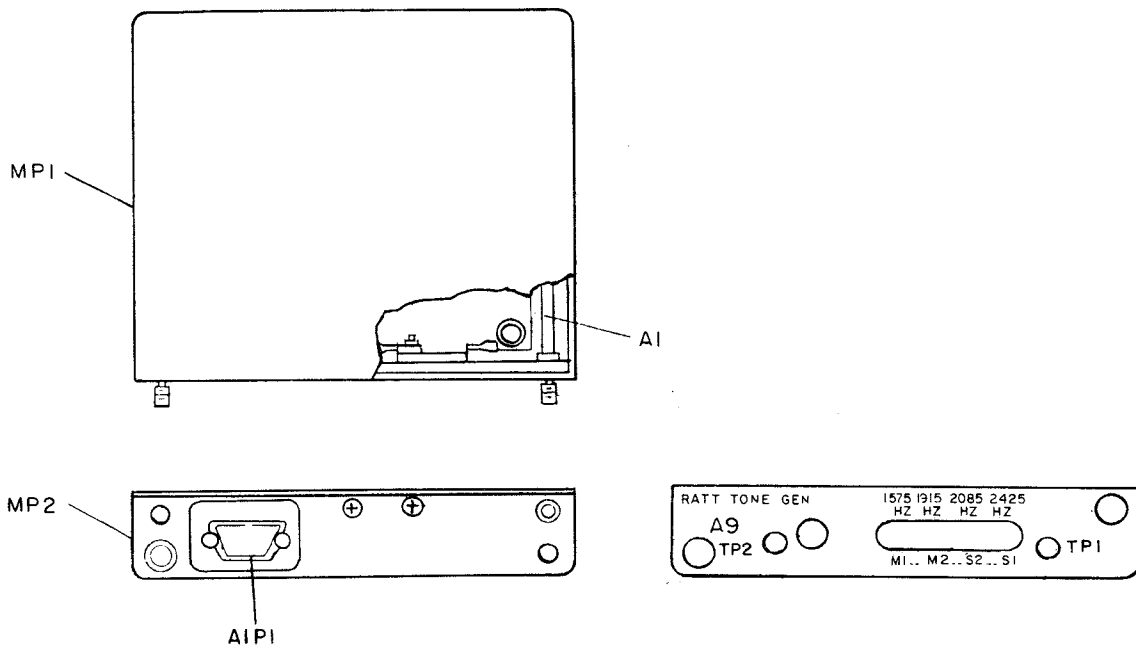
RATT Tone Generator Assembly A2A9,
